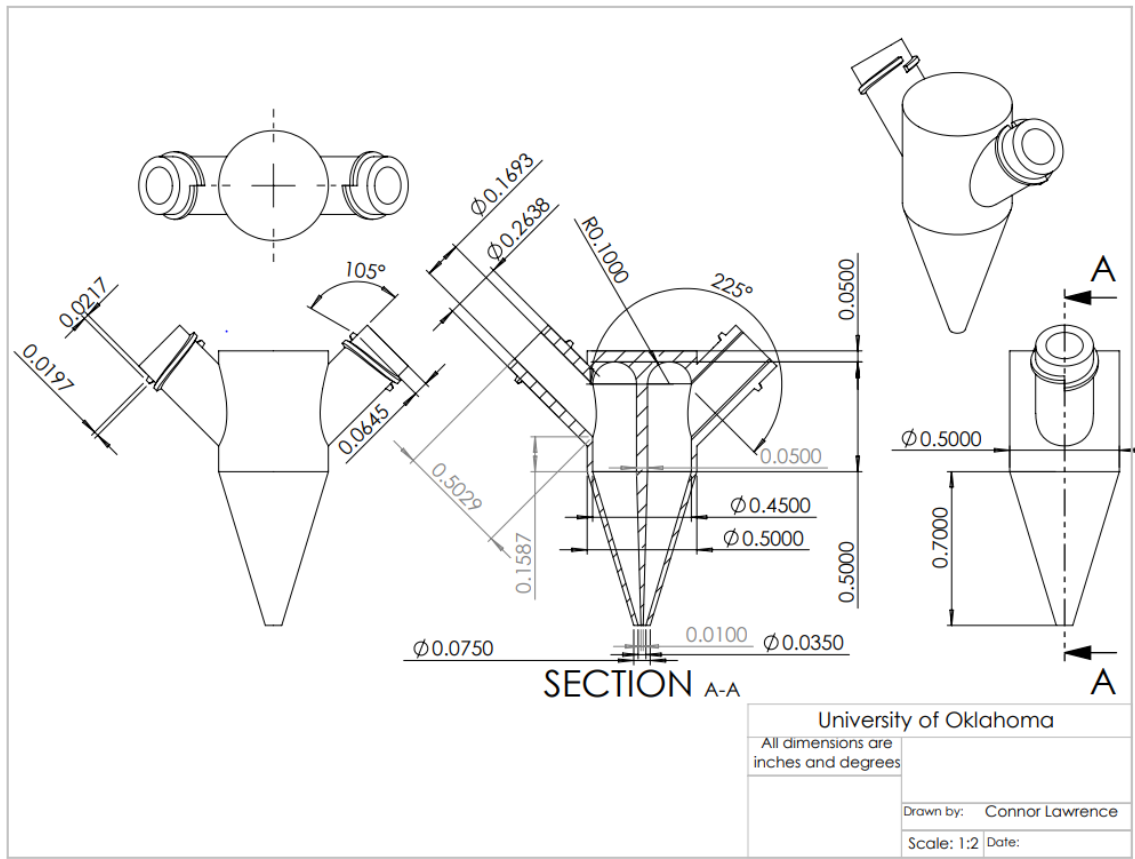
Dimensioned Engineering Drawing of the Circular Two Material Nozzle Design
